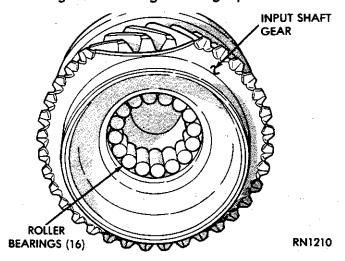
Removing/Installing Mainshaft Pilot Roller Bearings
